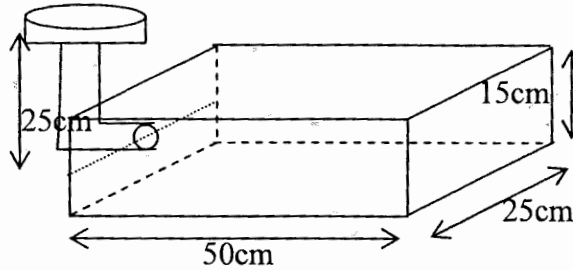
Schematic diagram of parting gate for a sand mold casting
